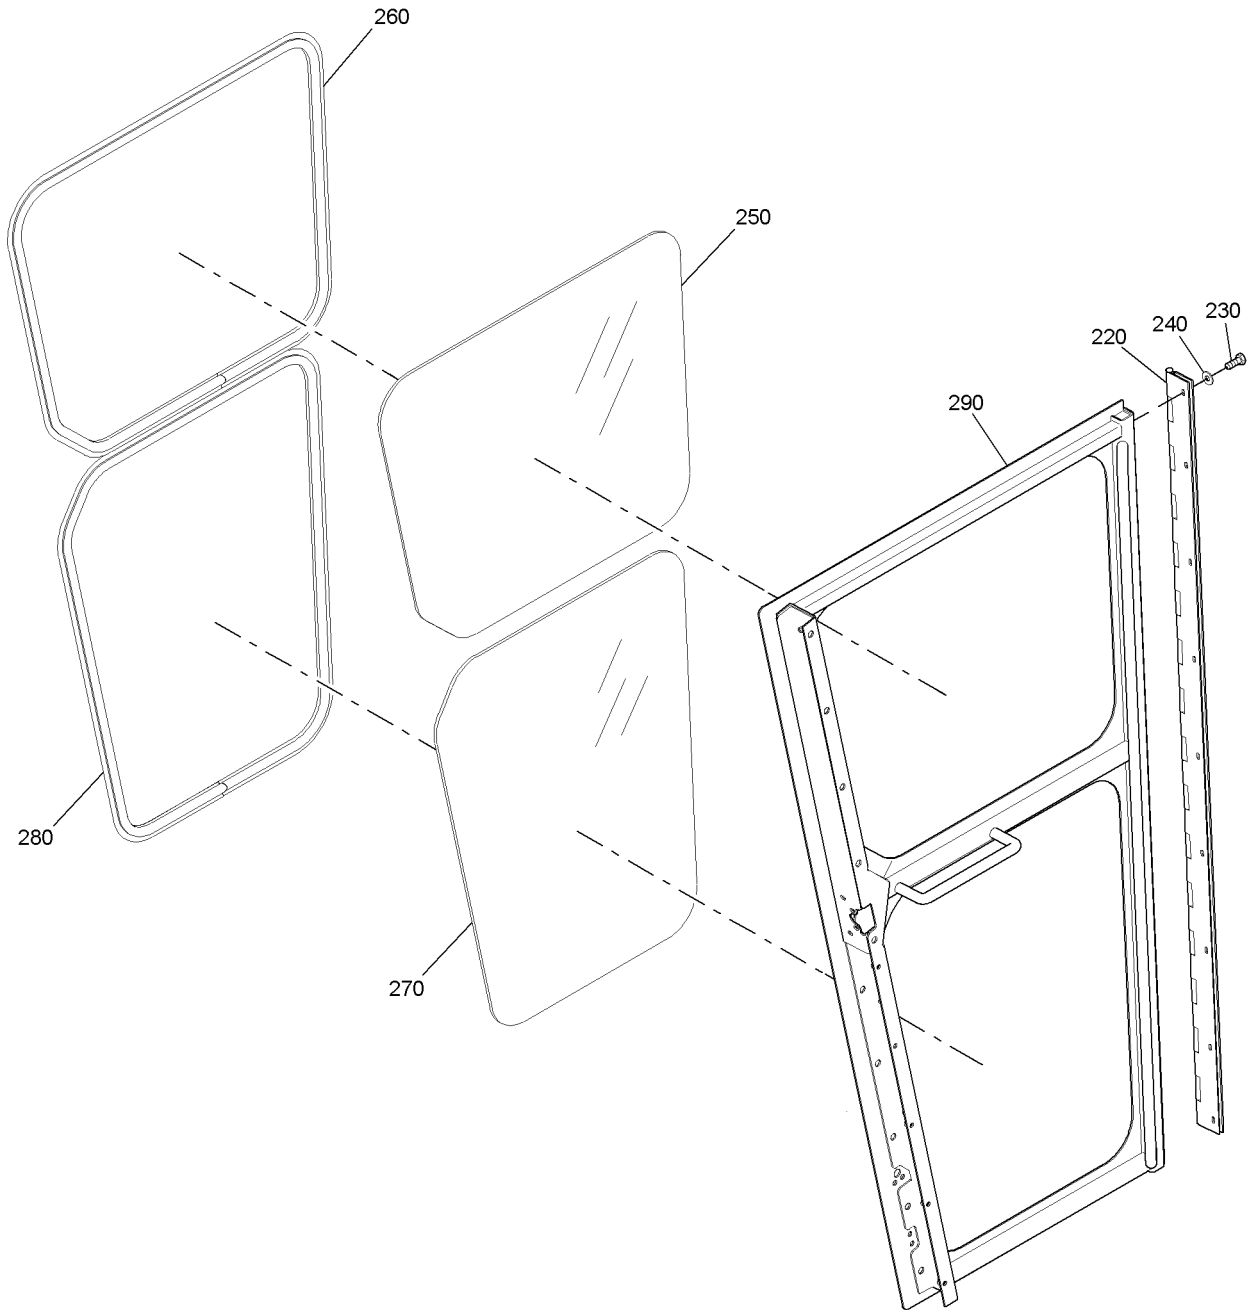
RIGHT-HAND DOOR ASSEMBLY (SHEET 2 OF 2)
